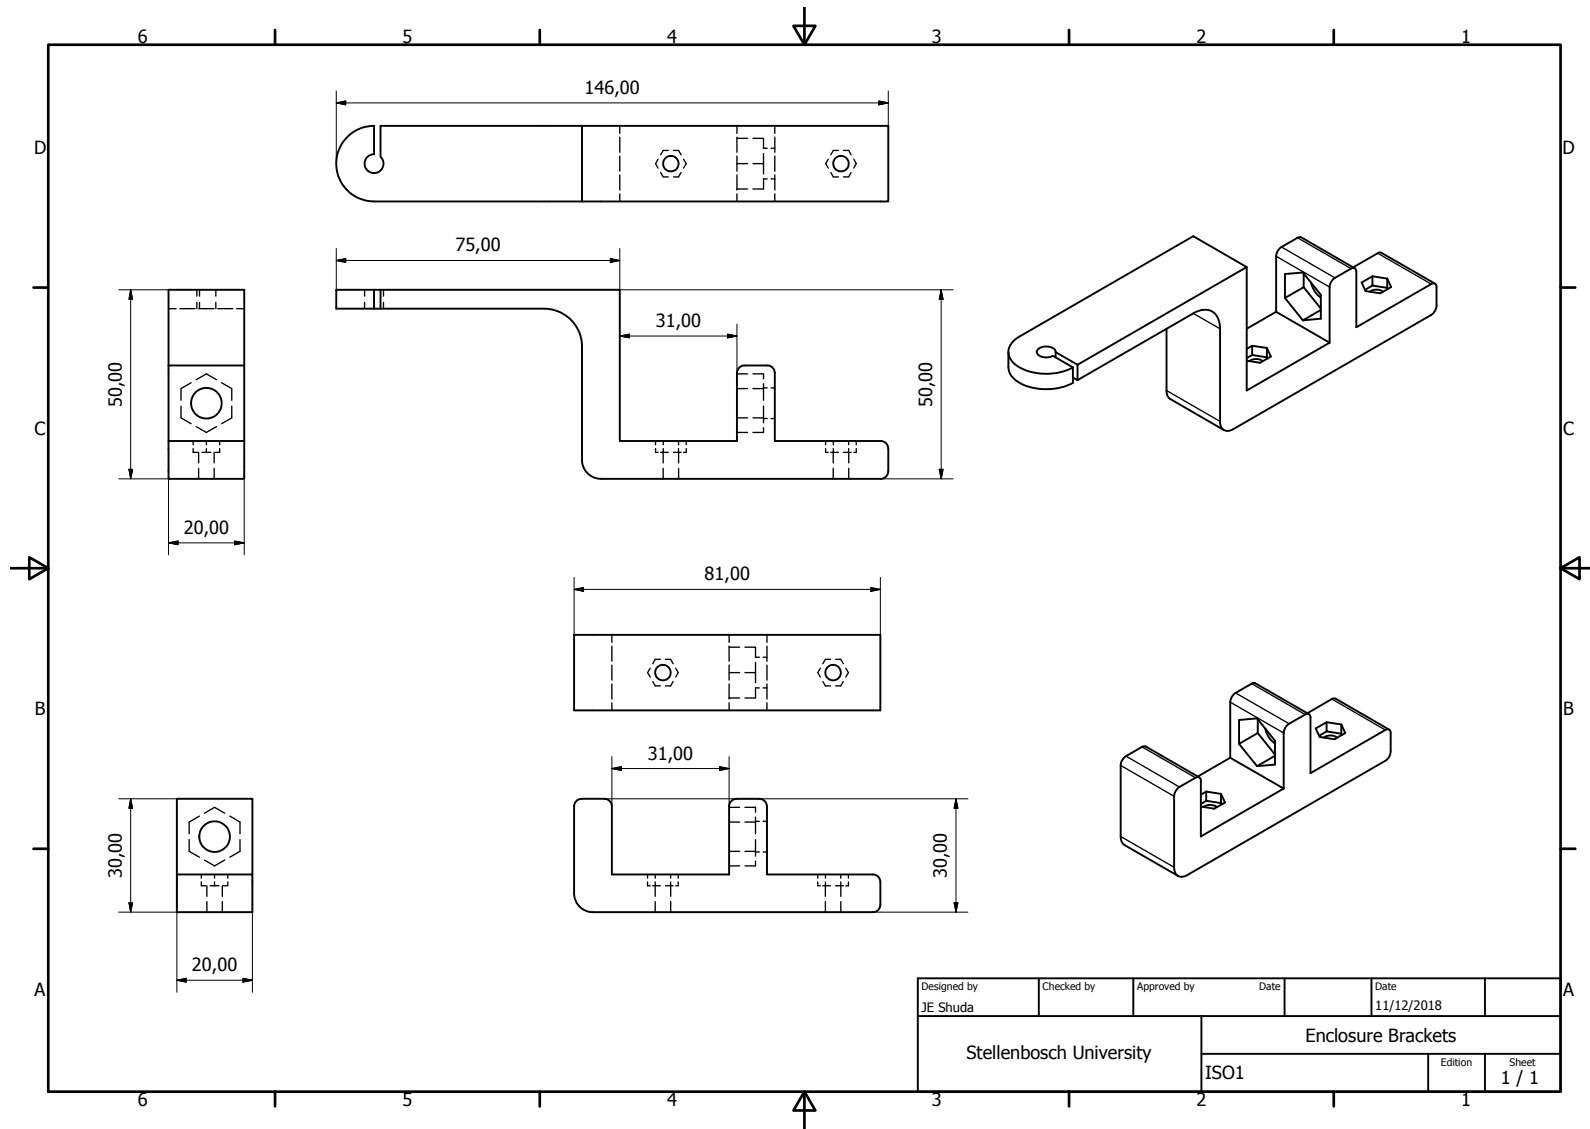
Sensor Node Version 2 and 3 Enclosure Brackets Design Drawing
